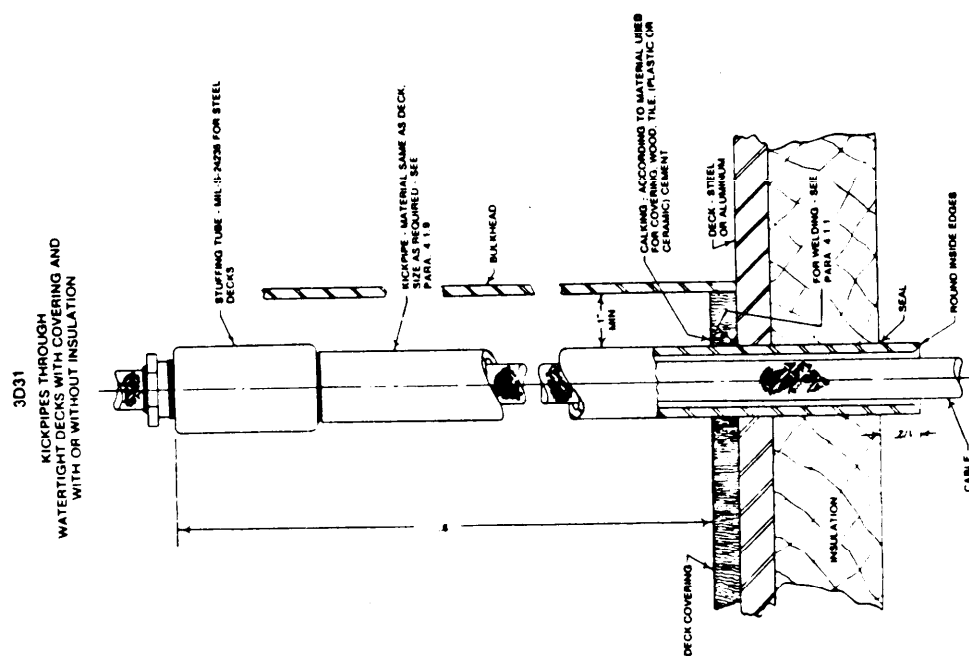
D3. Kickpipes through steel or aluminum decks.
